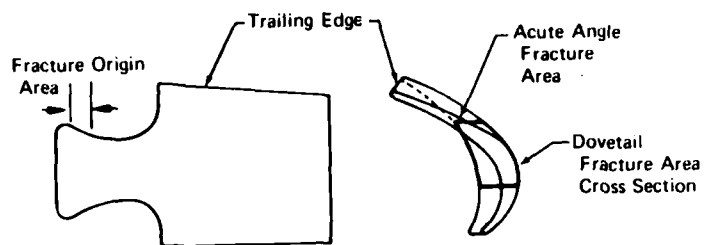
Fracture Origin Location on Failed Airfoil Blades
